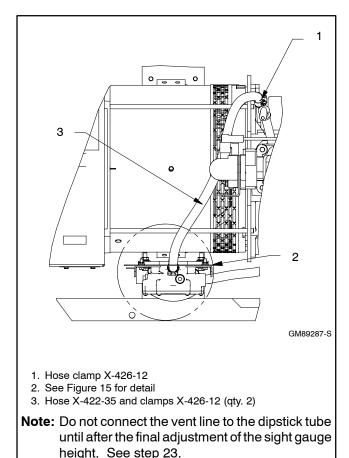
Top View, Hose Connection to Dipstick Tube (oil bottle not shown)
